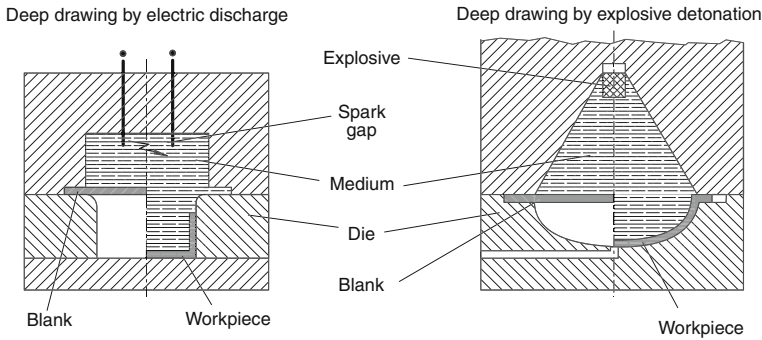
Deep drawing with electrical discharge and explosive detonation [DIN03h]
